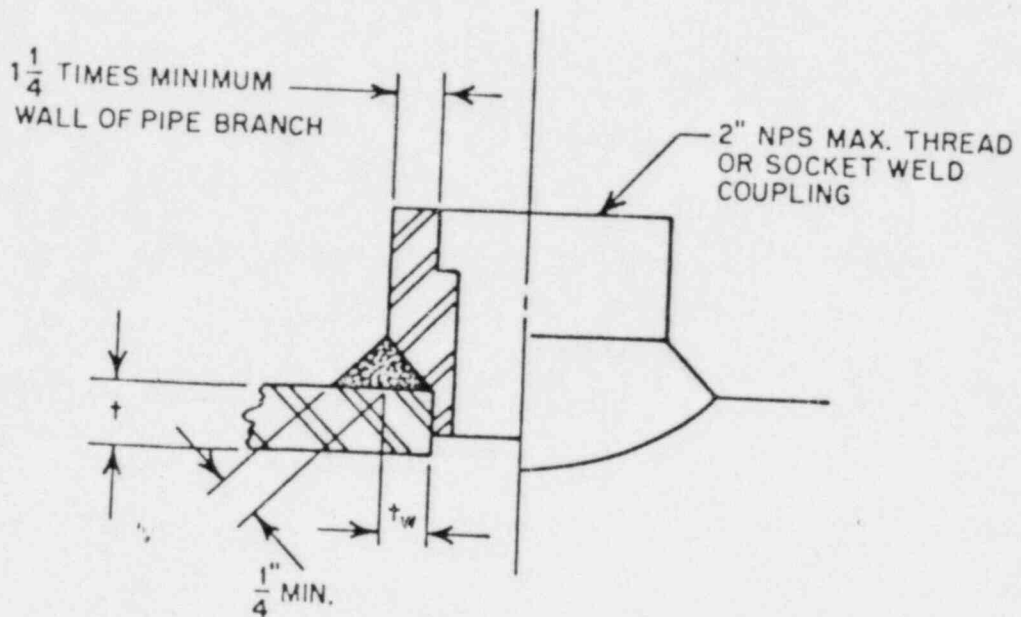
F PARTIAL PENETRATION COUPLING CONNECTION WITHOUT ADDITIONAL REINFORCEMENT
